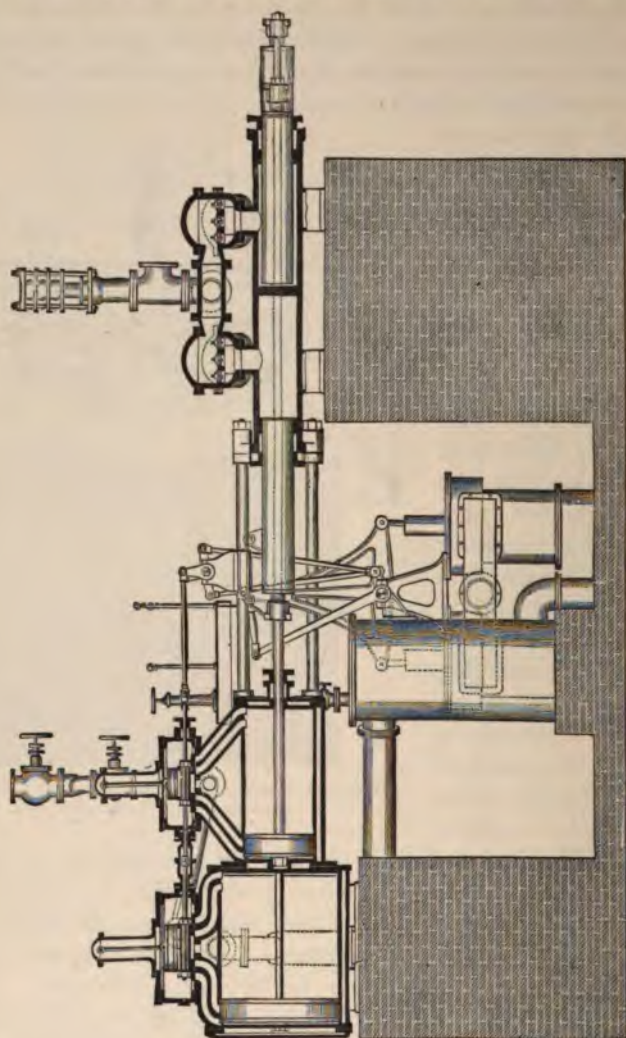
Worthington Compound Condensing High-pressure Pumping Steam Engine: Longitudinal Section.
